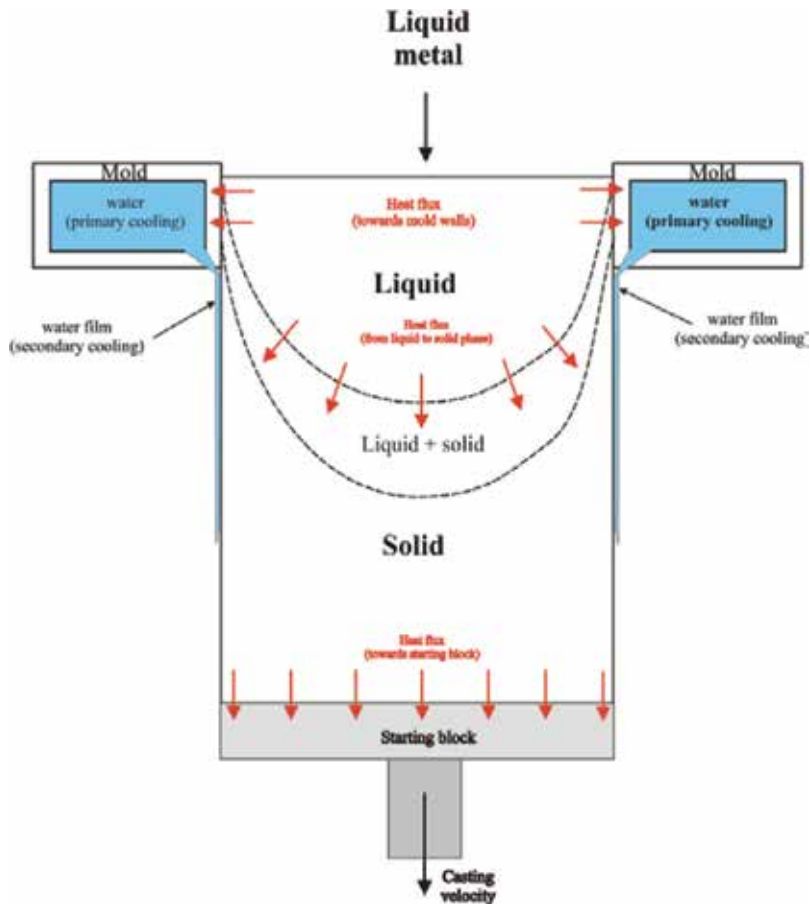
Heat extraction in DC casting; sketch showing main process variables.
